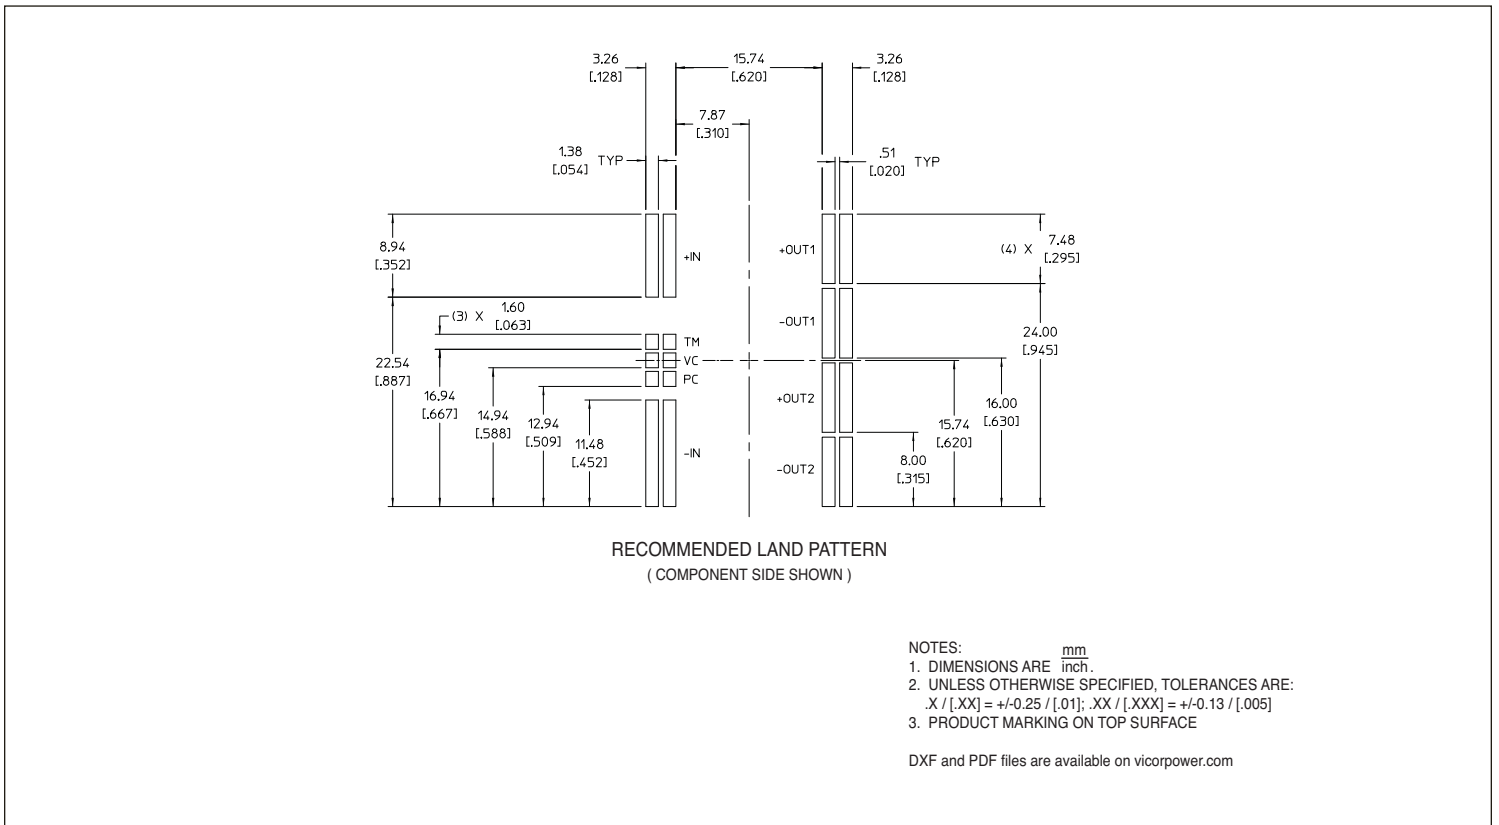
VTM J-Lead PCB land layout information; Onboard mounting
